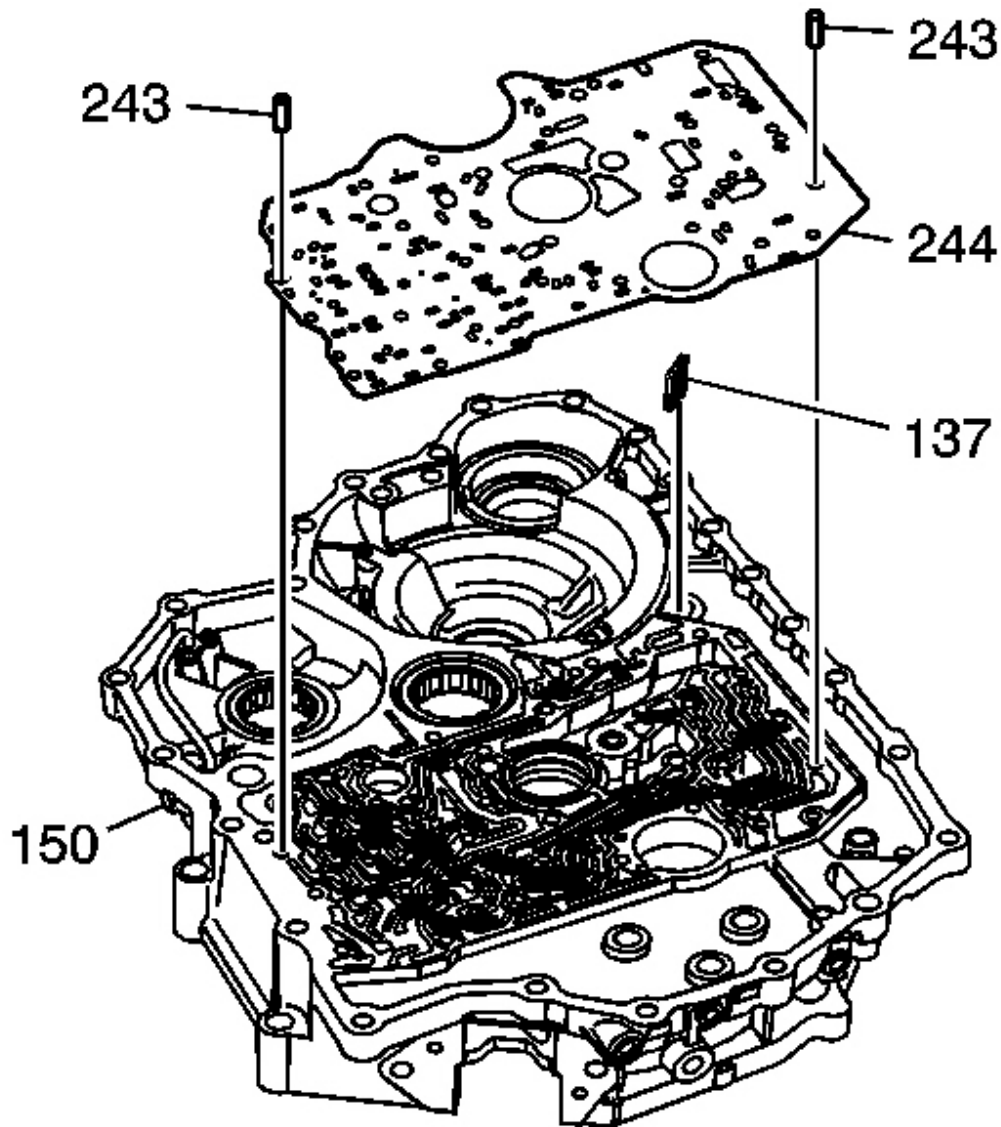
Control Valve Body Spacer Plate, Locating Pins & Transmission Magnet Chip Collector
